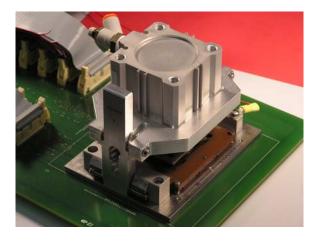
This is a picture of the 52.5 mm FCPBGA-HP module / interposer assembly test vehicle in the closed clam shell Socket test fixture.
